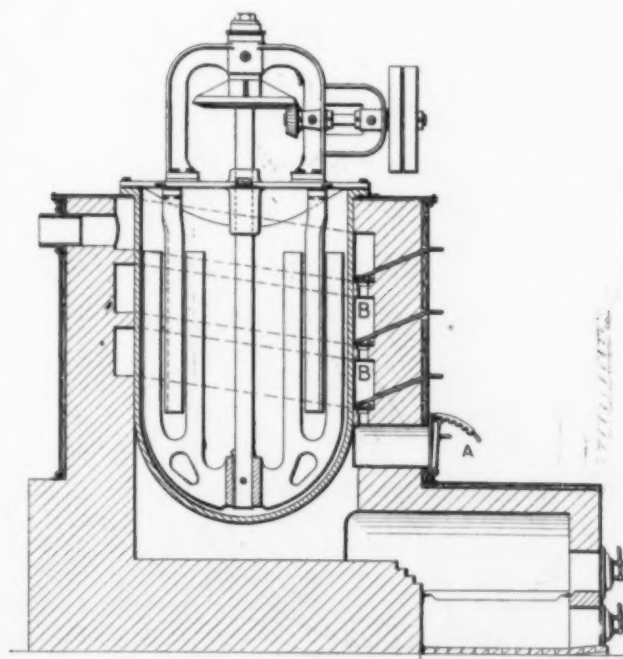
DEEP FORM OF FUSION KETTLE IN A DUTCH OVEN SETTING
